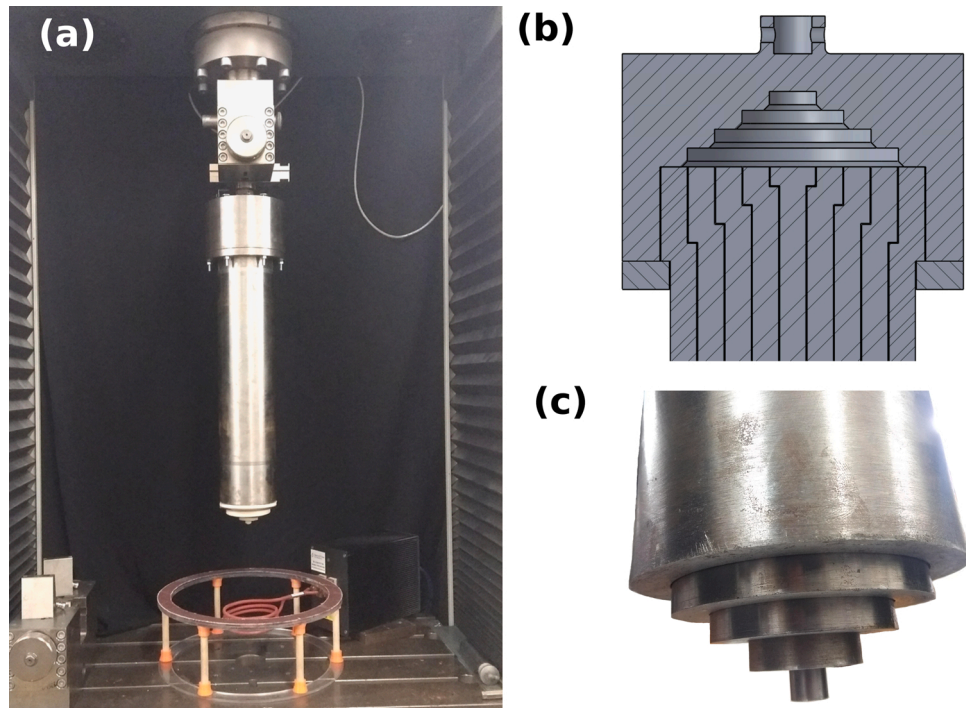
(a) Reconfigurable multi-step tool fitted inside a universal test machine. End of tooling fitted with 3d printed ABS ripple tooling, (b) internal geometry of the upper housing of the multistep tooling in free hanging position and (c) close-up showing the end of the steel tool.
